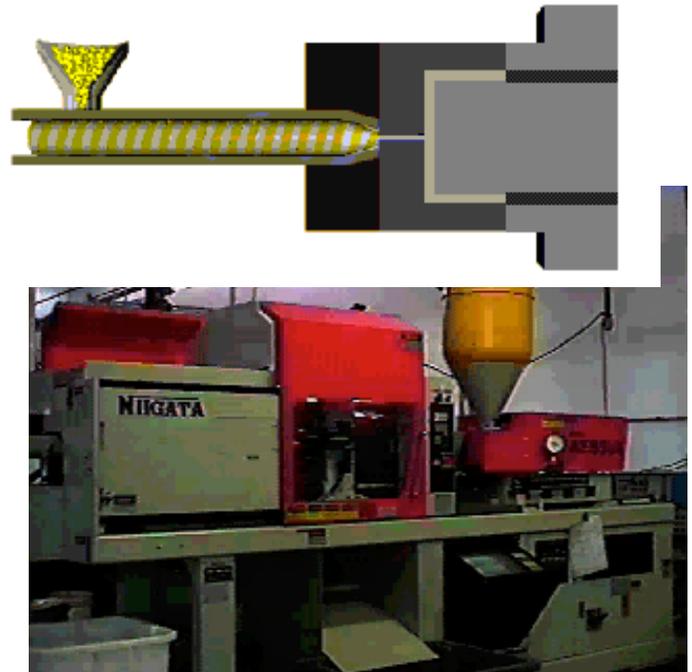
A snap shot of the animation showing an injection molding machine in its closed position. Text and the optional voice over explain that, "Injection molding is a common polymer process used to form thermoplastics, such as
